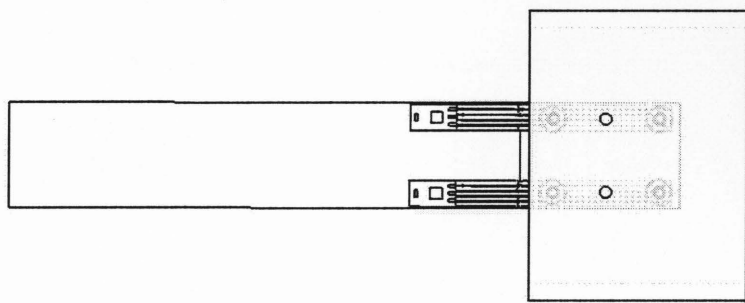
Front view of test-fixturing assembly with cantilever plate
